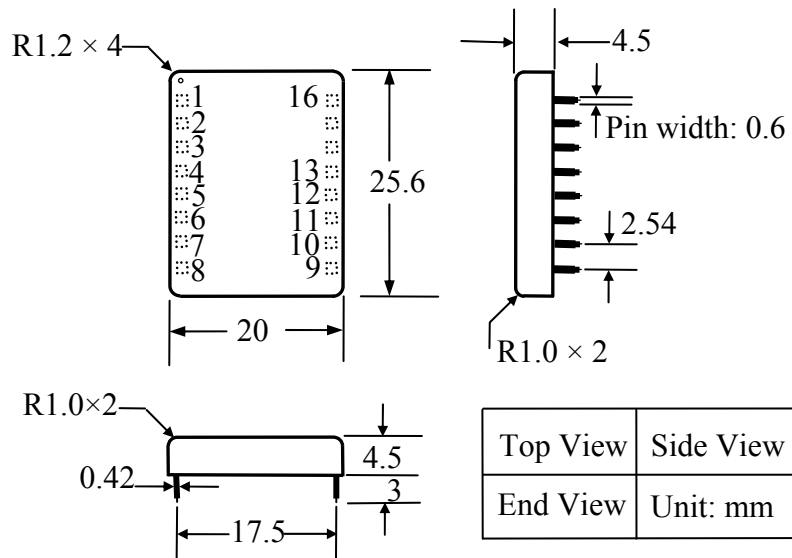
Dimensions of the DIP package controller of TECA1-XV-XV-D
